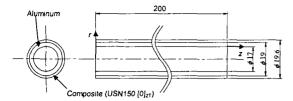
Co-cured hybrid shaft specimen (Units in mm).
